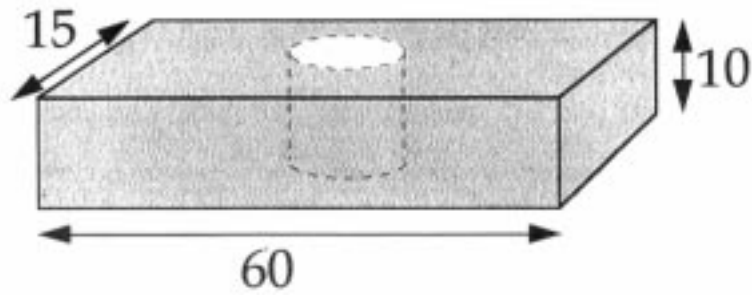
UHMWPE specimen showing location of core drilled sample (dimensions in mm).
